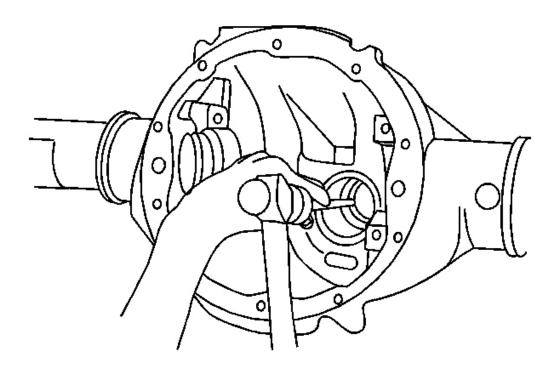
Removing Outer Pinion Bearing Cup Courtesy of GENERAL MOTORS CORP.
